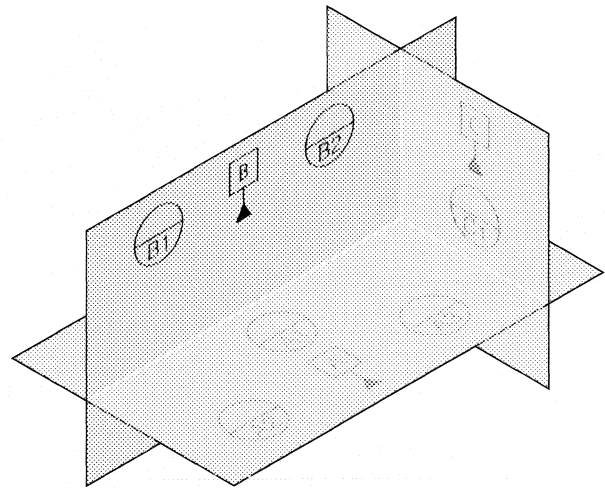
Datum Targets Used to Establish a Datum Reference Plane
